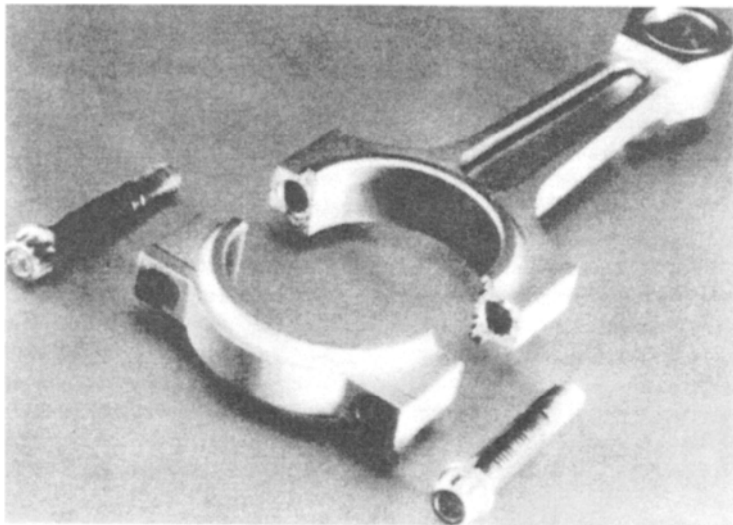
Connecting rod for BMW V-8 automobile engine fabricated from steel powder, followed by forging. (Reproduced courtesy of GKN Sinter Metals, Germany.)
